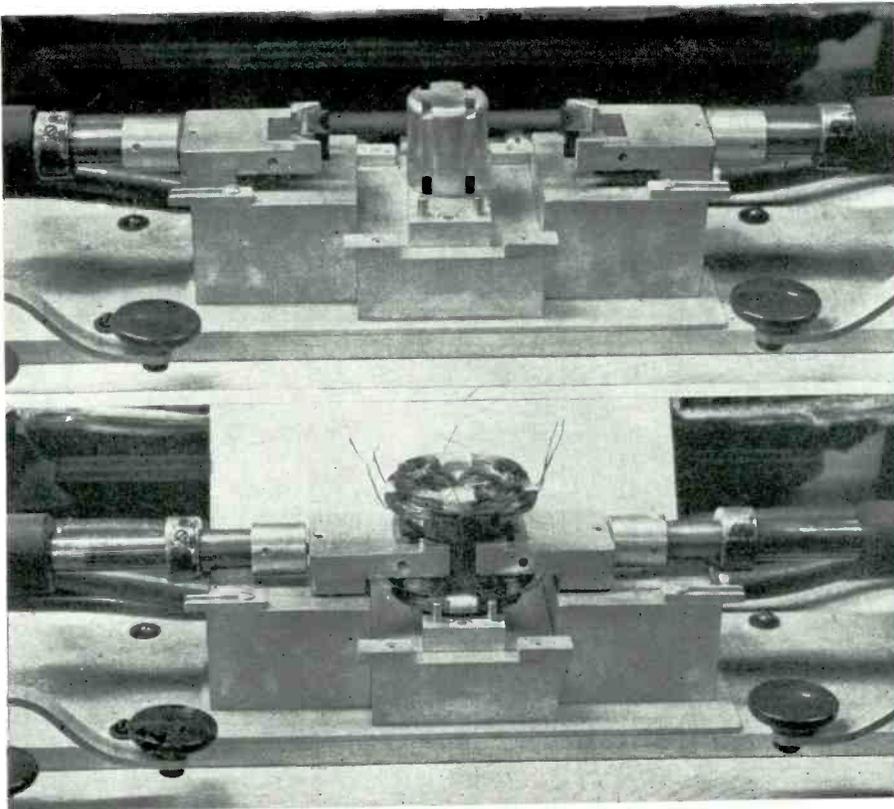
(Above) Final assembly fixture open; (Below) final assembly fixture closed
